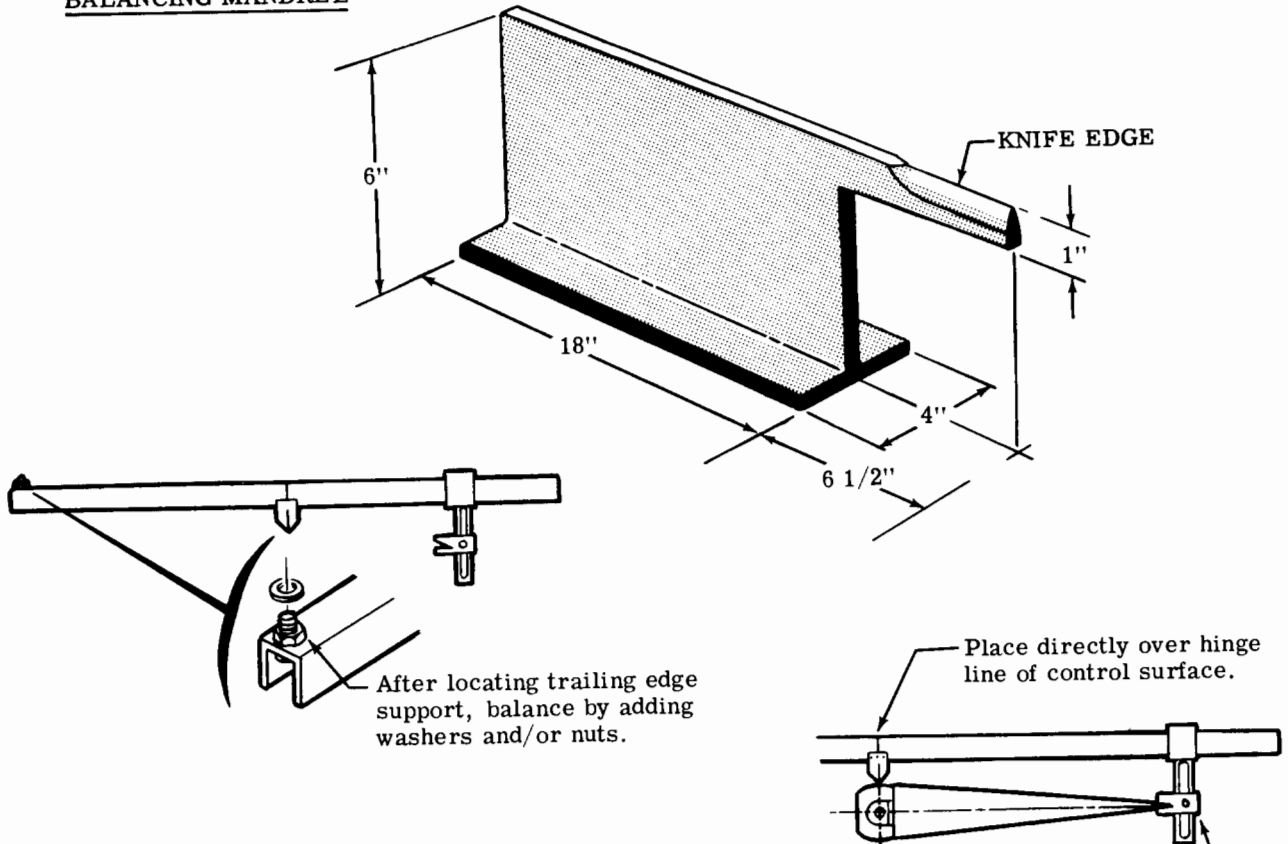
Control Surface Balancing (Sheet 1 of 3)
